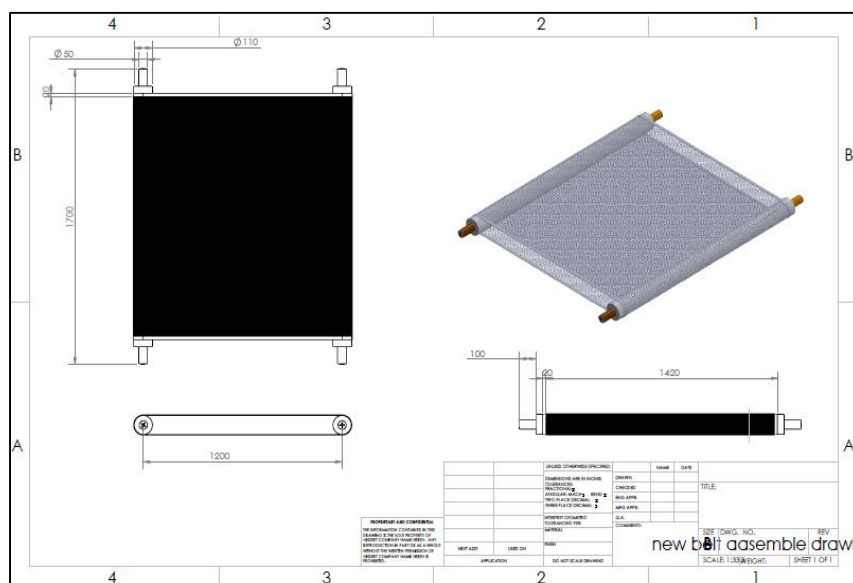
Design of Roller Belt Assemble for Nucleation Chamber.
